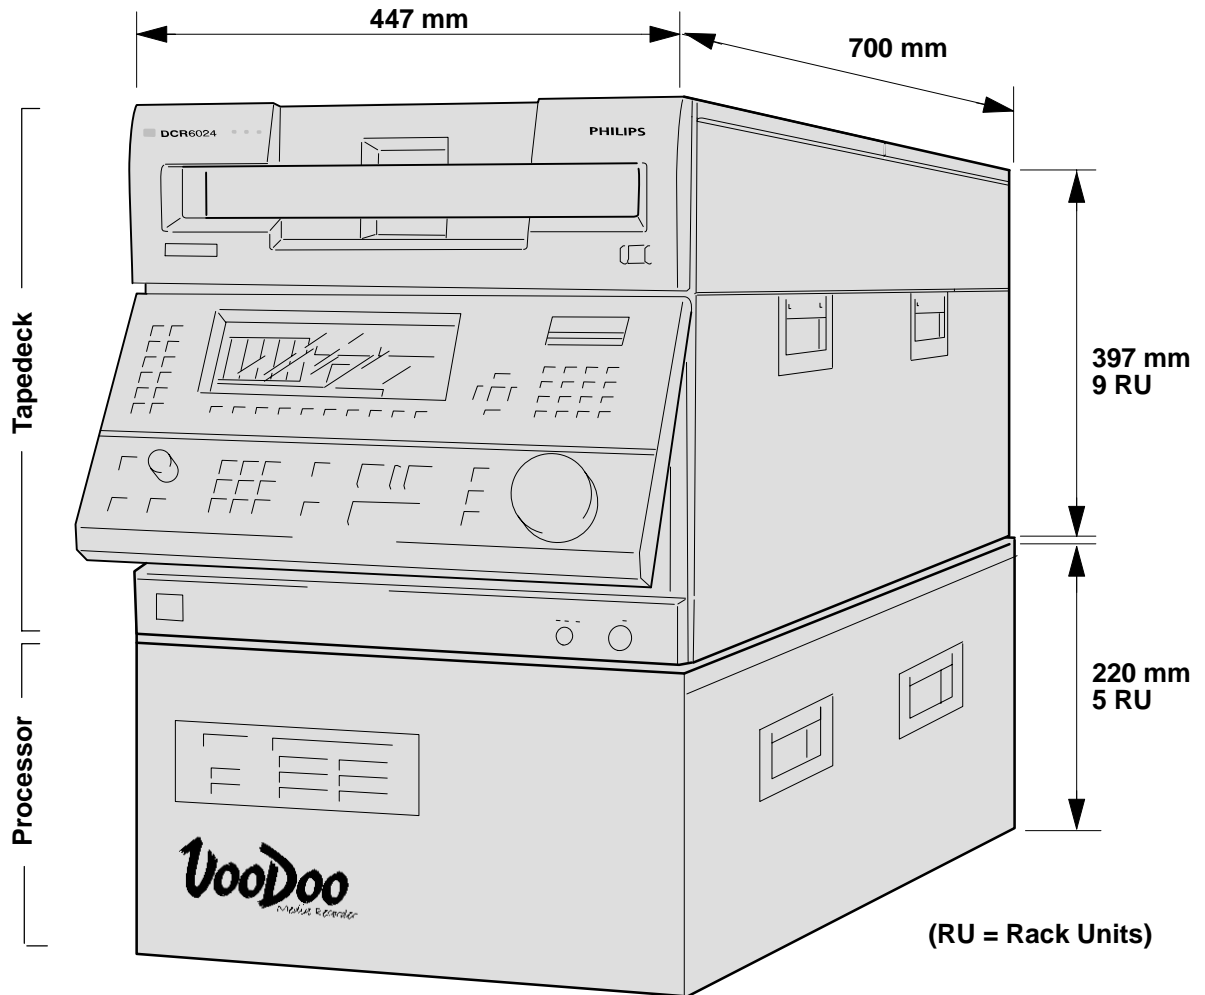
DCR 6128 dimensions (without required air inputs for a 19 inch cabinet mounting)
